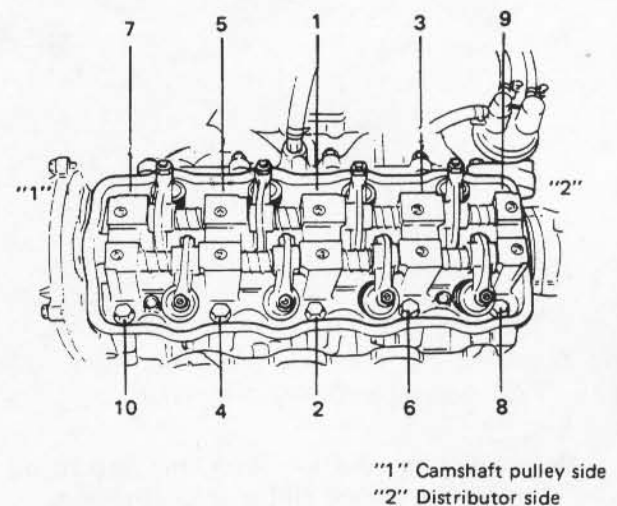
Tightening Sequence of Cylinder Head Bolts
